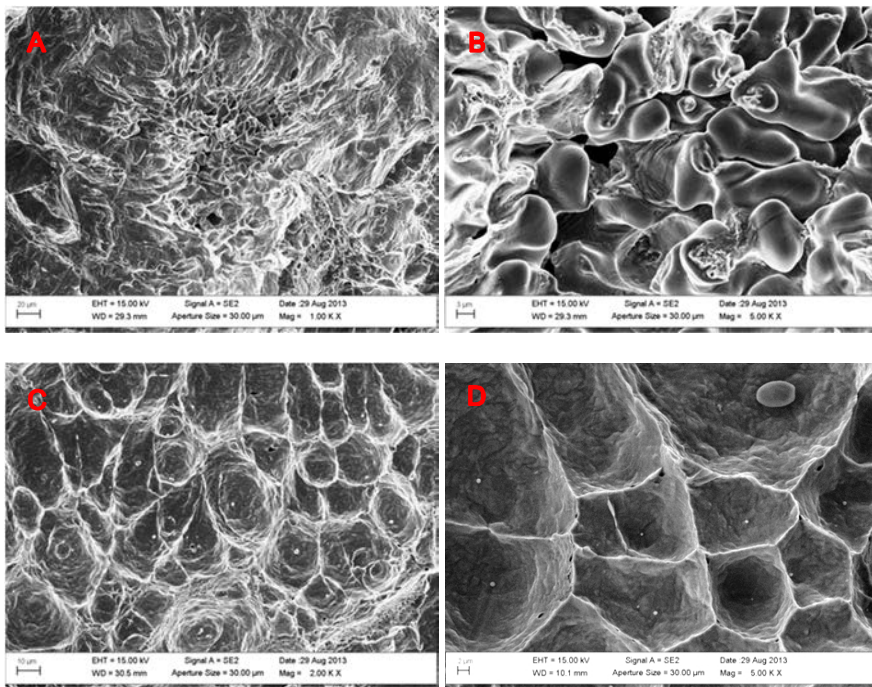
Fracture surfaces of Alloy 52 miniature-sized weld metal specimens of as-welded (A) and PWHT states (B).
